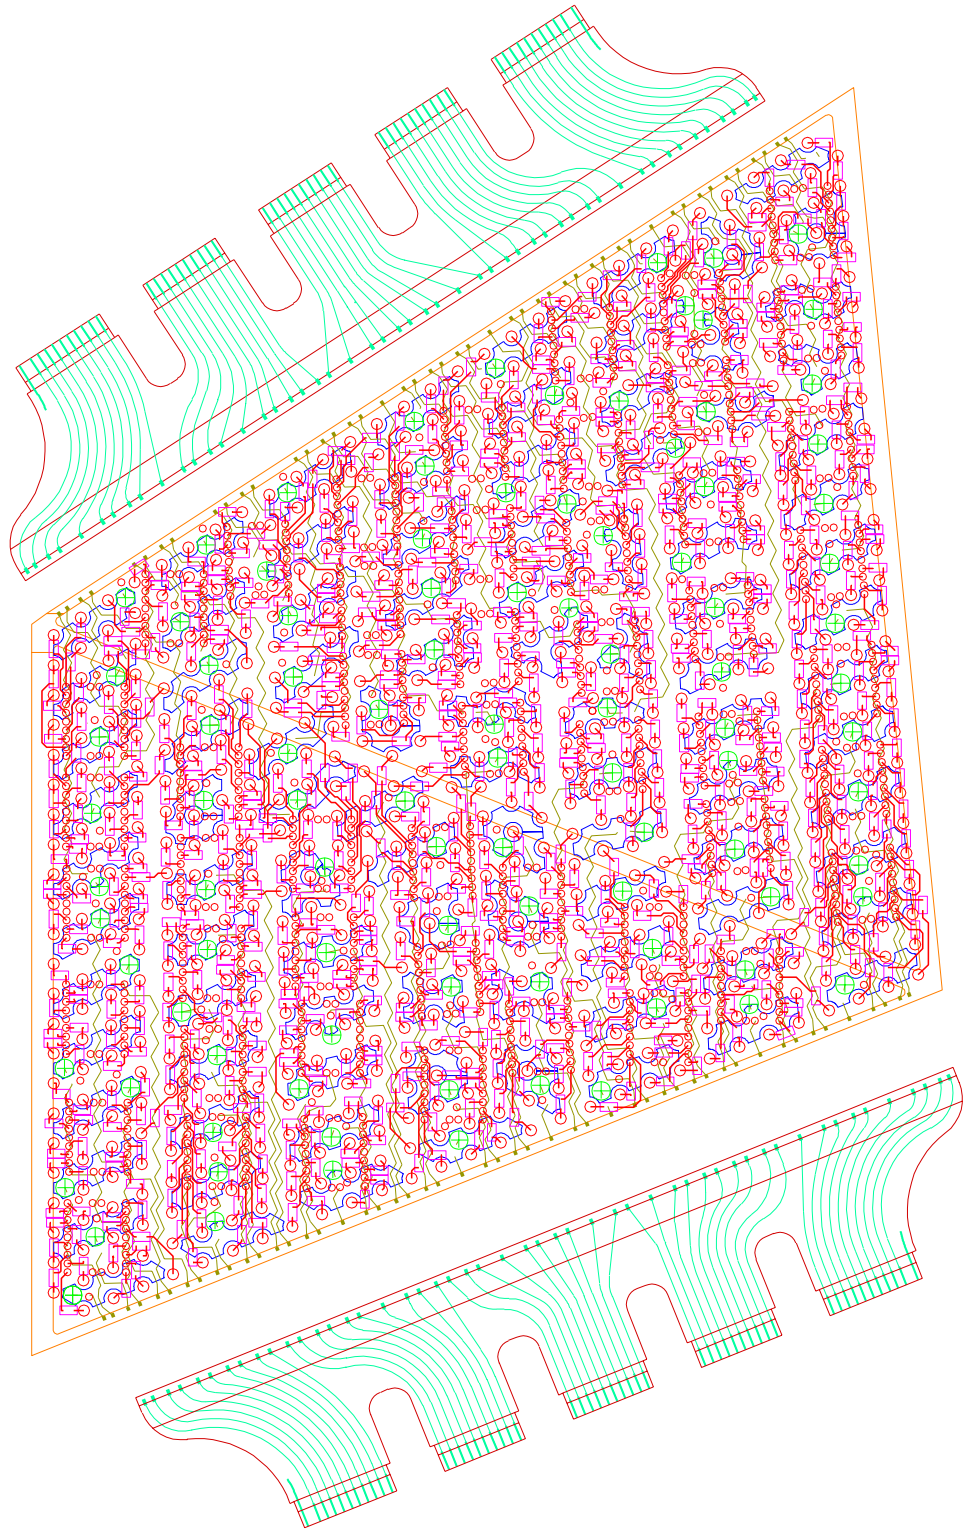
Printed circuit layout of the tension plate superimposed on the HV board.
